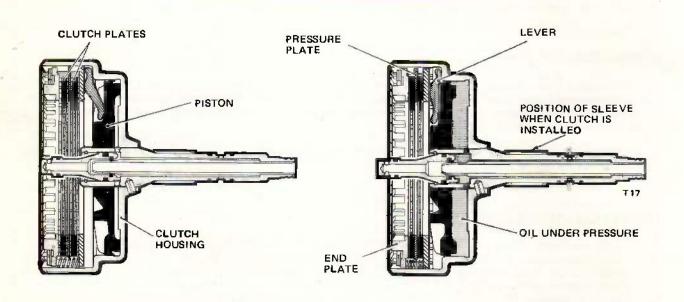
CUT AWAY VIEW OF FORWARD CLUTCH
